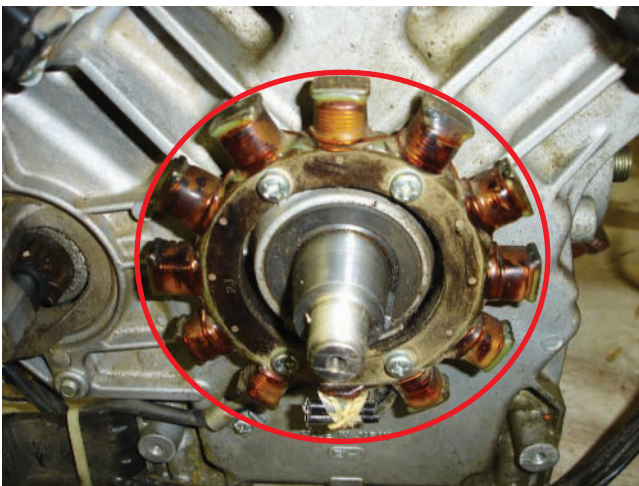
The stator is mounted onto the crankcase in most power equipment engines.
